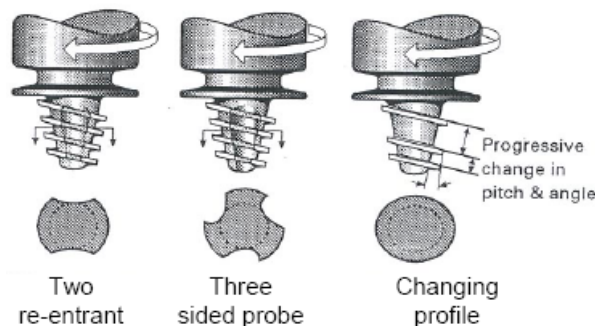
TWI's Whorl™ type FSW tools for welding thick workpieces (Nicholas and Kallee, 2000)
